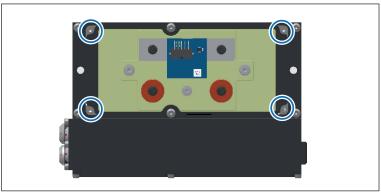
HV BM 1.2, housing open, M3 threaded holes marked
